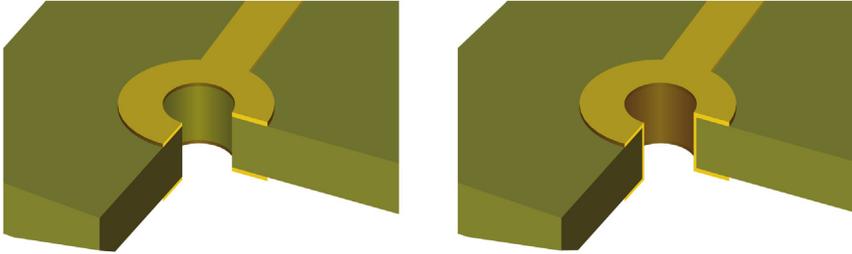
Holes are drilled into the board and copper plated: (left) a nonplated through hole and (right) a plated through hole.
